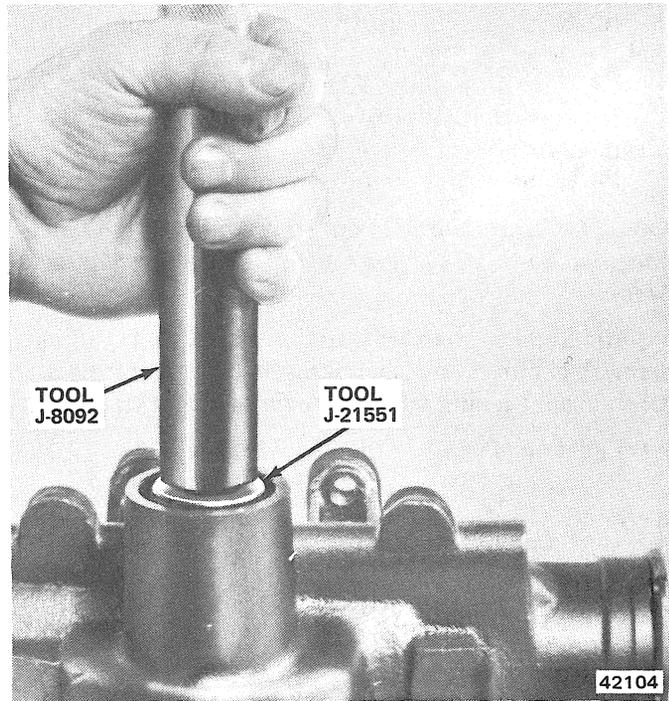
L-18 Pitman Shaft Bearing Removal/Installation
